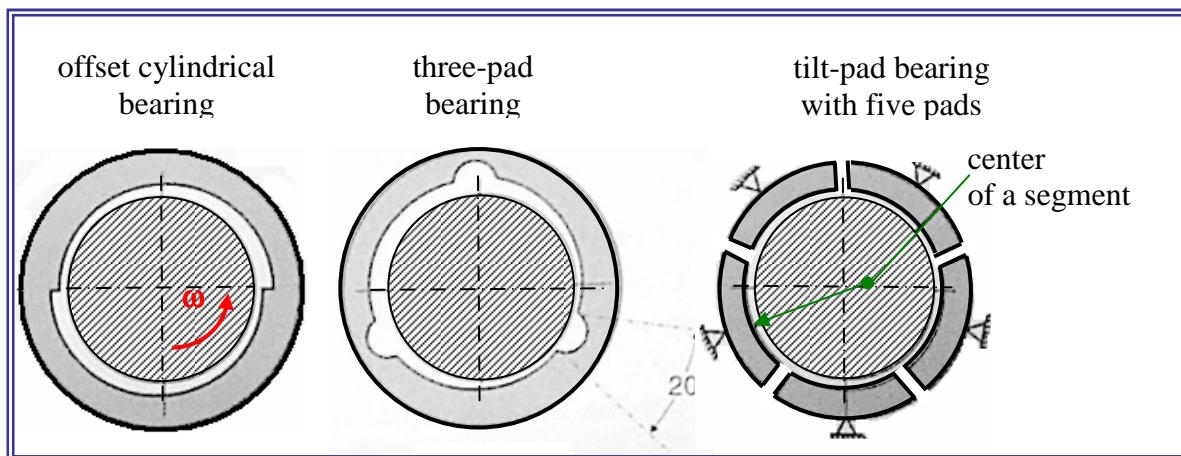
Other Types of Journal Radial Bearings
